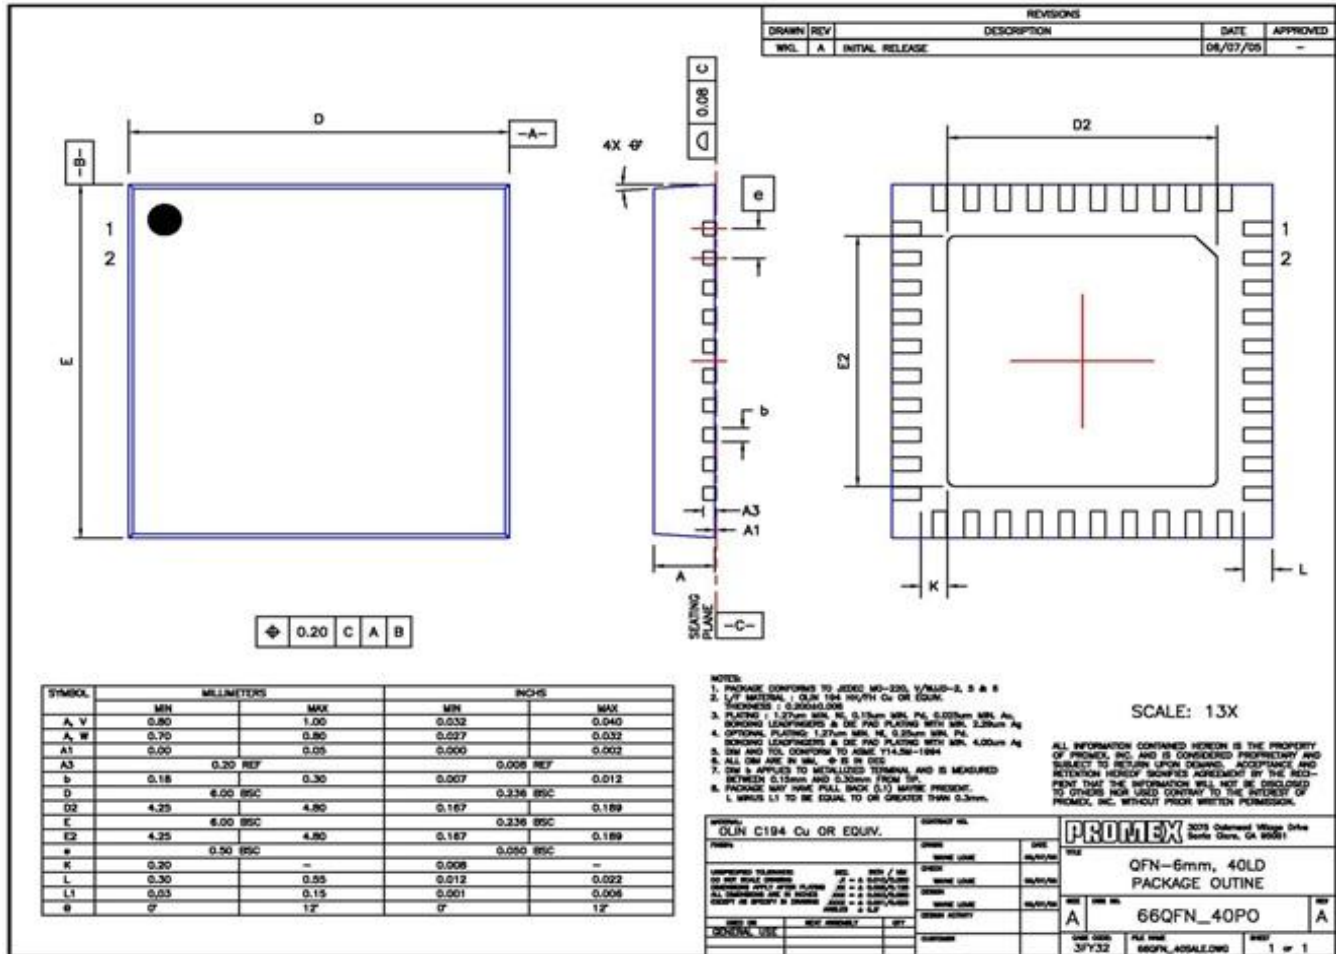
QFN 40-Pin Package Drawing (All Dimensions in mm)
